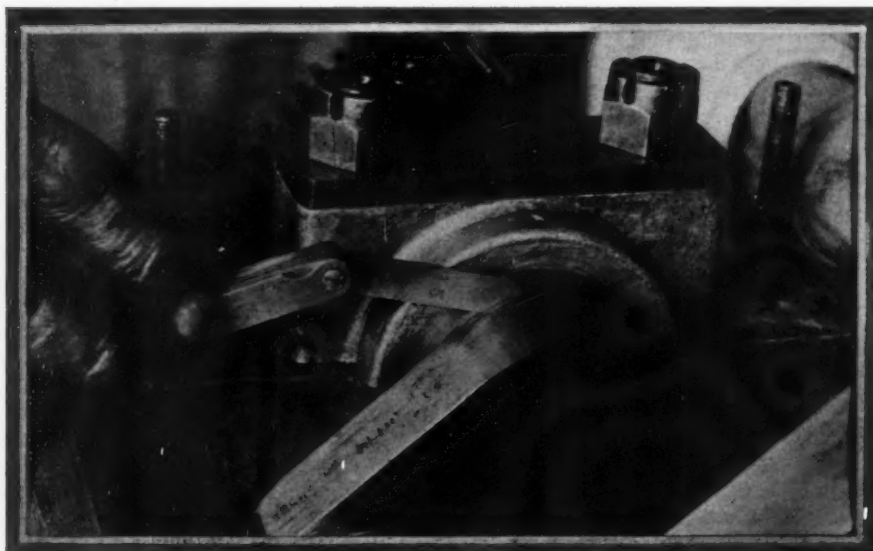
Showing how the feeler gauge is used in connection with the motor bearings to ascertain the amount of clearance between the webs of the crankshaft and the side of the bearings
